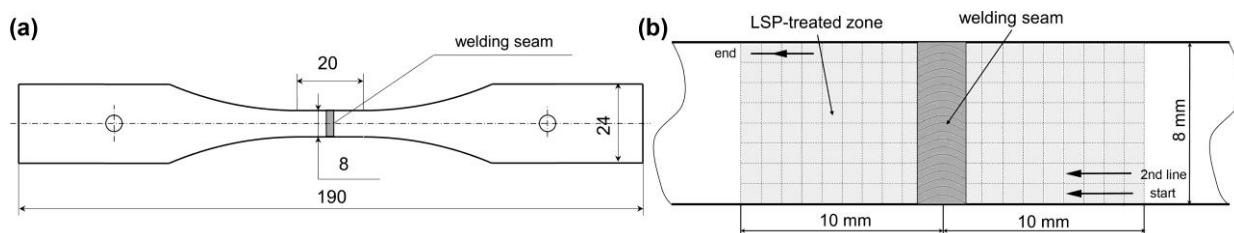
(a) Geometry of the S-N specimen used (dimensions in mm); (b) schematic view of the LSP-treated region.
